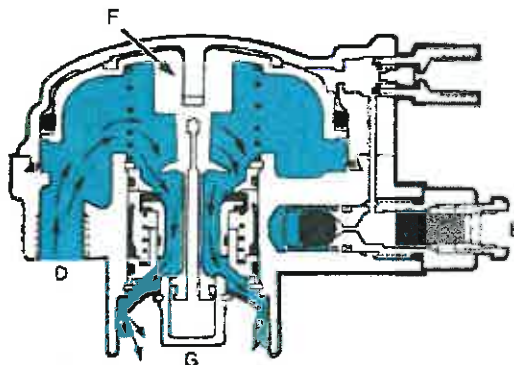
Spring Brake Relay Valve – Emergency Line Failure
